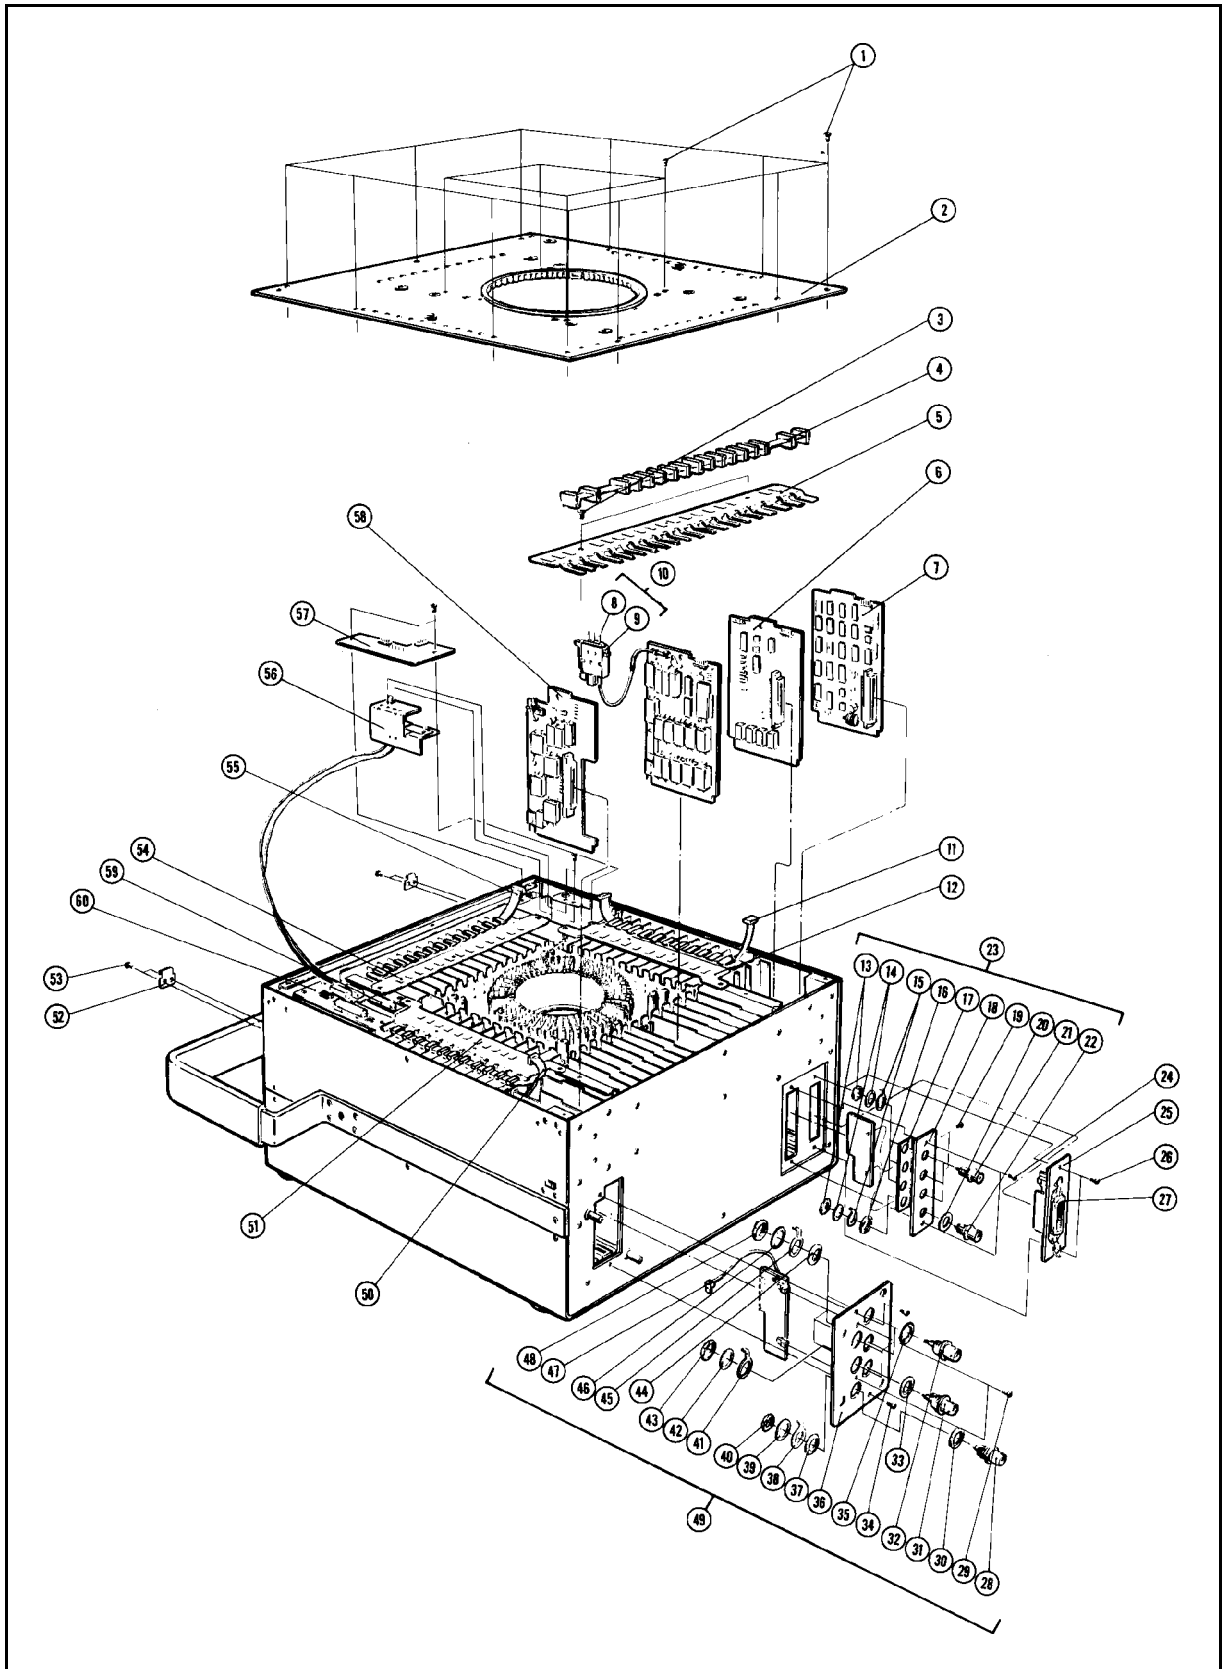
HP 4085B 48-pin SWM Major Mechanical Parts
